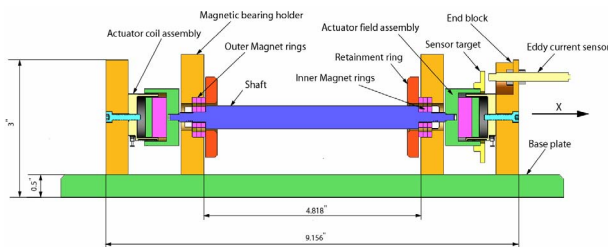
Section view of the Maglev plant showing major dimensions (inches) and main component details. X refers to the axial displacement of the shaft
